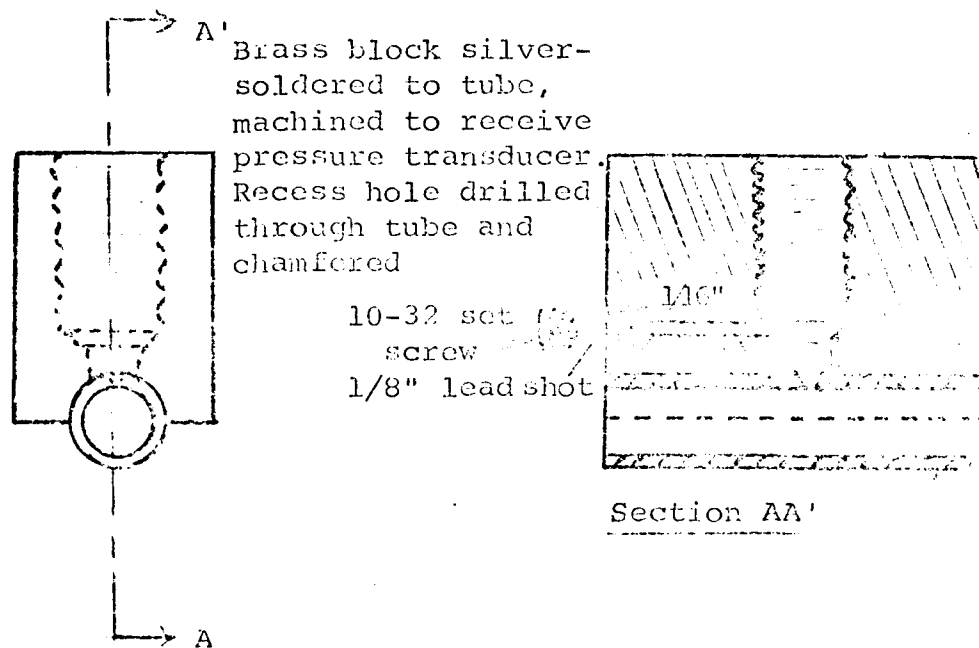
Detail of Recess Transducer Mount in a Tube
